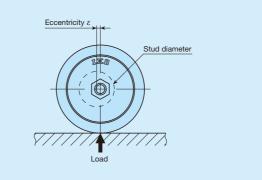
Reference position for adjusting of Solid Eccentric Stud Type Cam Followers and Eccentric Type Cam Followers
